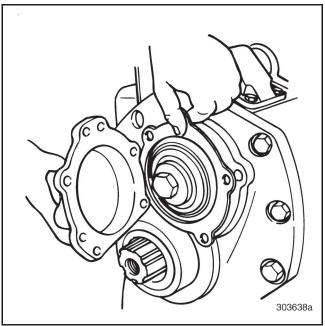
Removing Front-Drive Shaft Bearing Cover and Gasket
